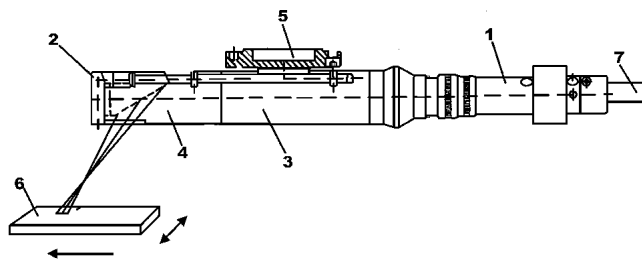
Experimental setup for laser processing: (1) Collimator, (2) Integrating mirror, (3) Body, (4) Mirror head, (5) Mounting flange, (6) Coating/substrate, (7) Optical fiber
